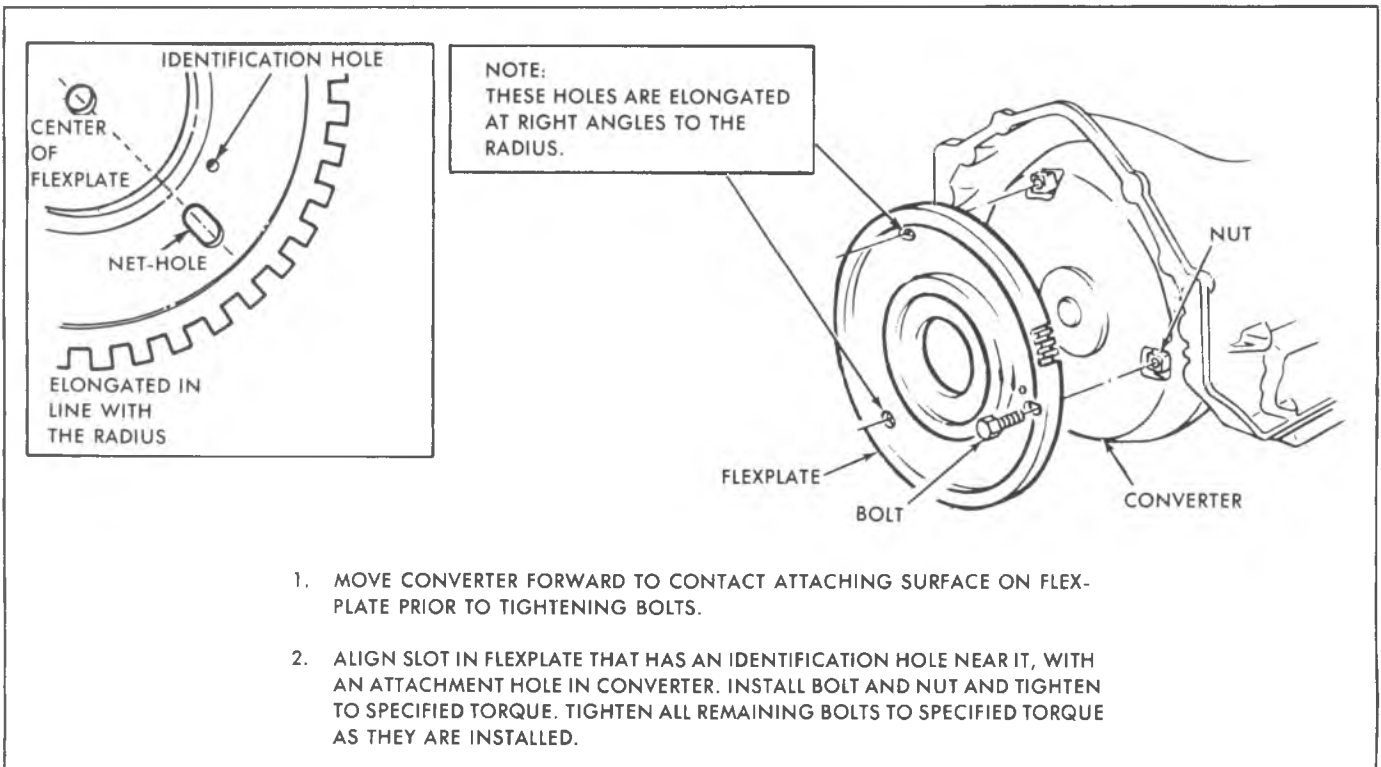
A-14--Typical Transmission Mounting, Net-Hole Design
